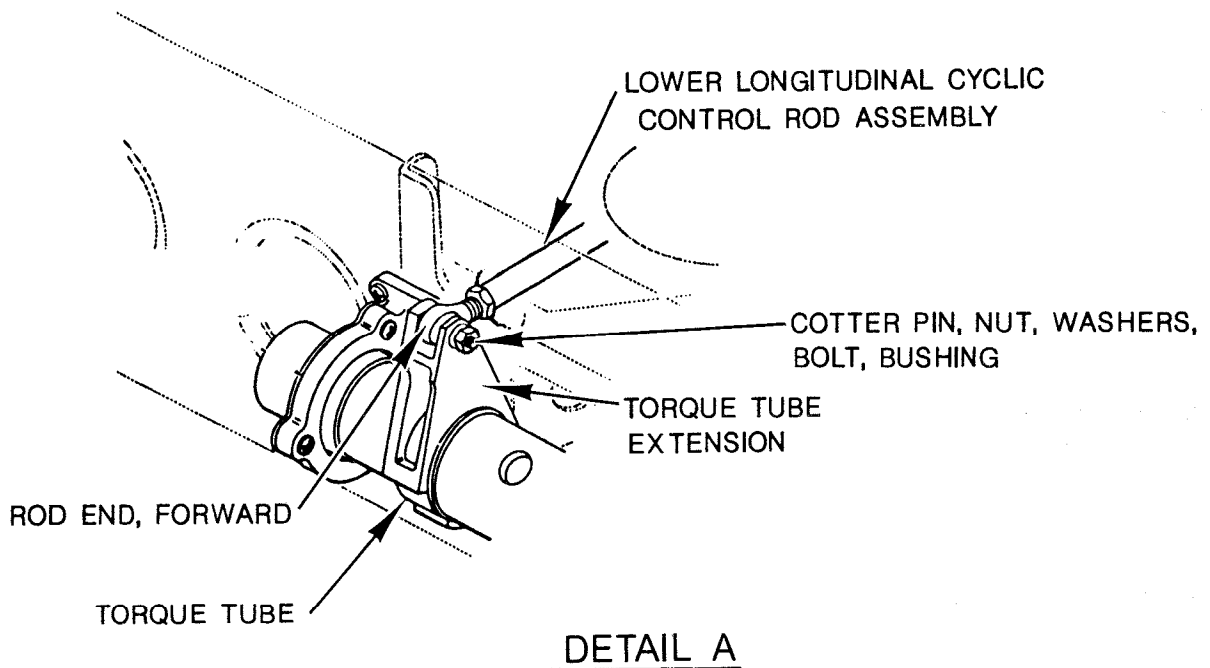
Spacer tube installation, Lower Longitudinal Cyclic Control Rod Assembly
